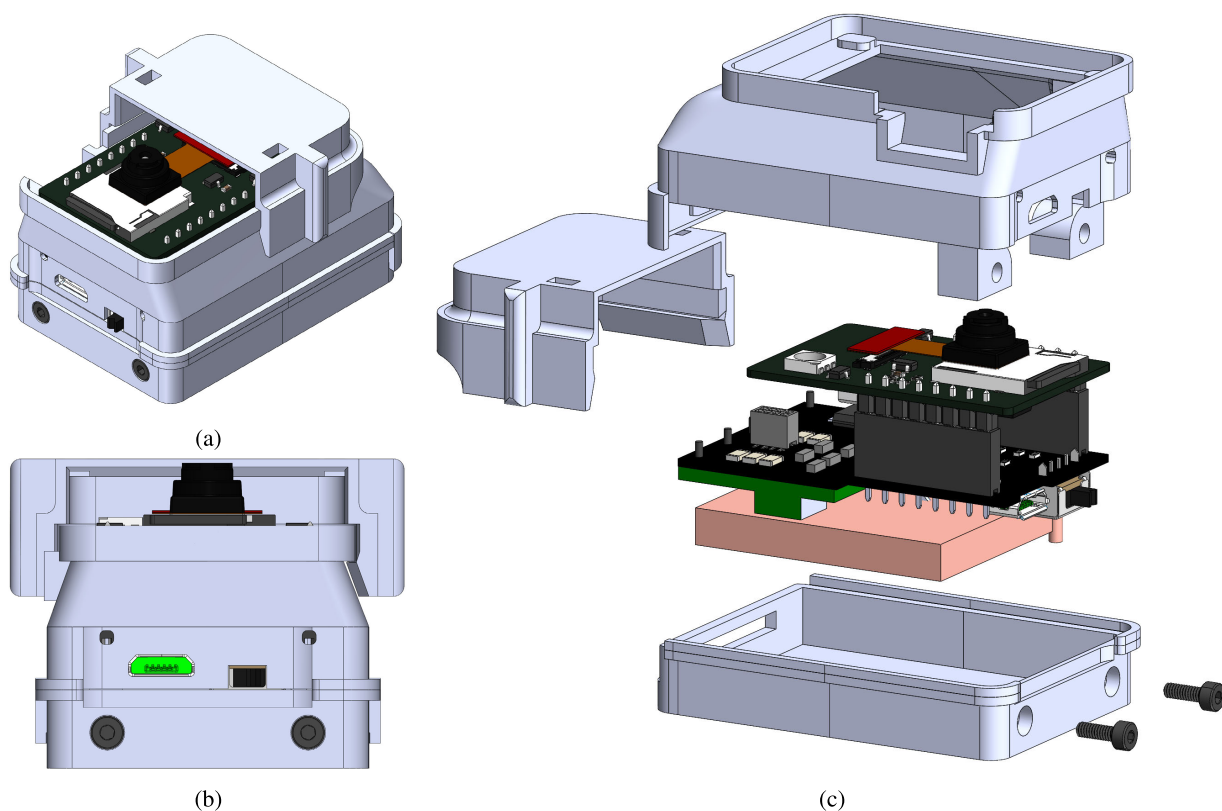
Acquisition module. (a): 3D view; (b): side view; (c): exploded view.
